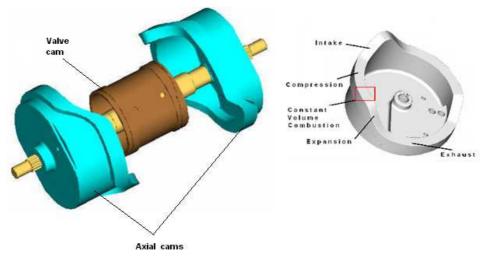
The axial cams, stroke positions on the cam and valve cam of the project engine
